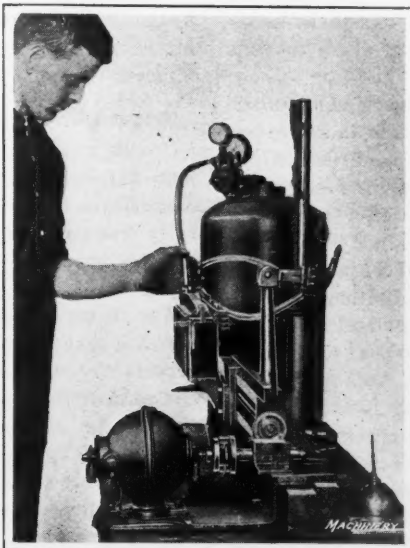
Machine shown in Fig. 14 with Clamps closed to hold Work Ready for welding
